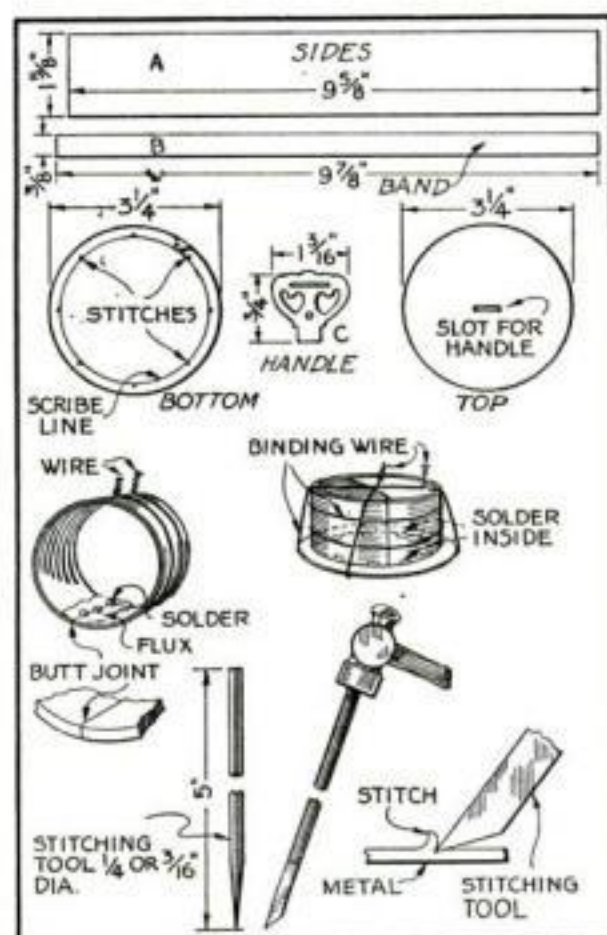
Dimensions of the various parts, method of stitching, and the stitching tool.
